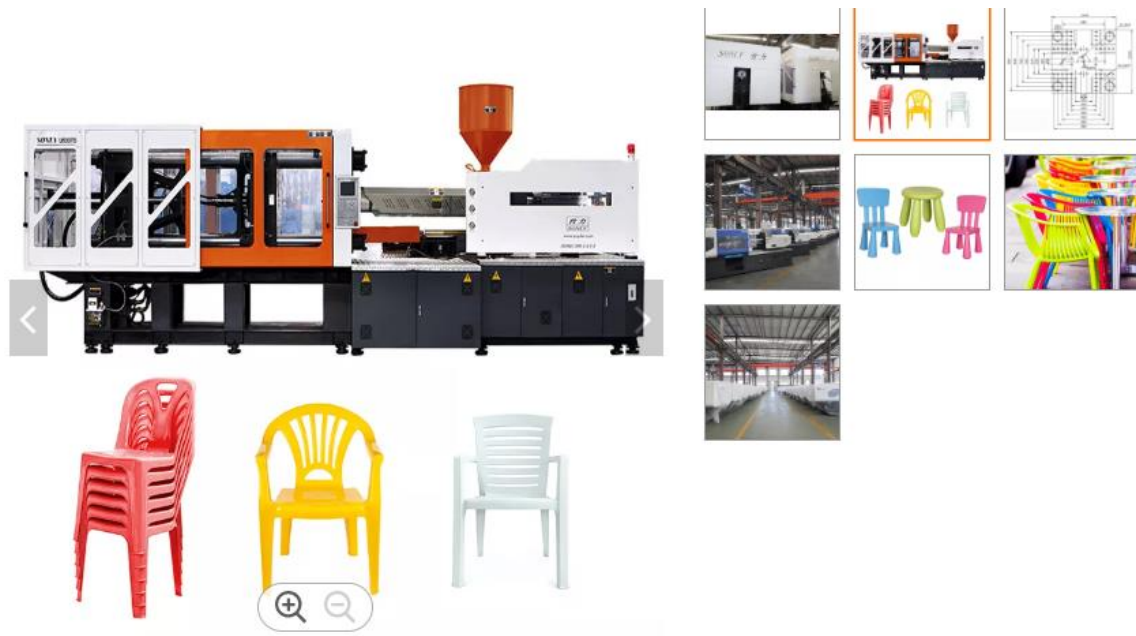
Ton automatic plastic table and chair making equipment injection plastic molding machine for sale⁶⁴
